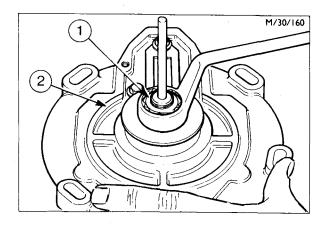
Installing a New Bearing Cup 1. Installer 2. Drive Hub Housing
